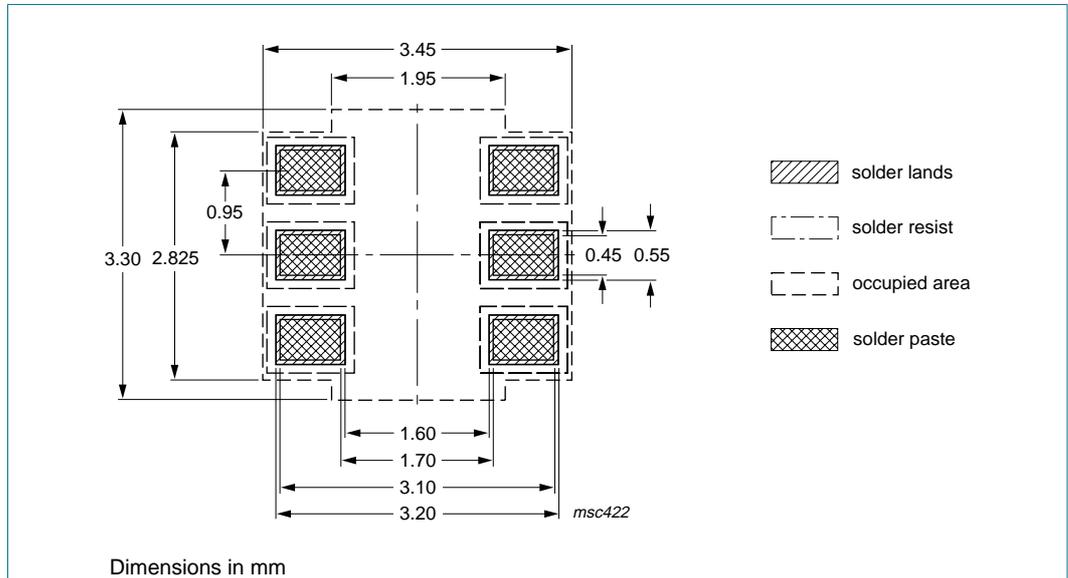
Reflow soldering footprint SOT457 (SC-74)
